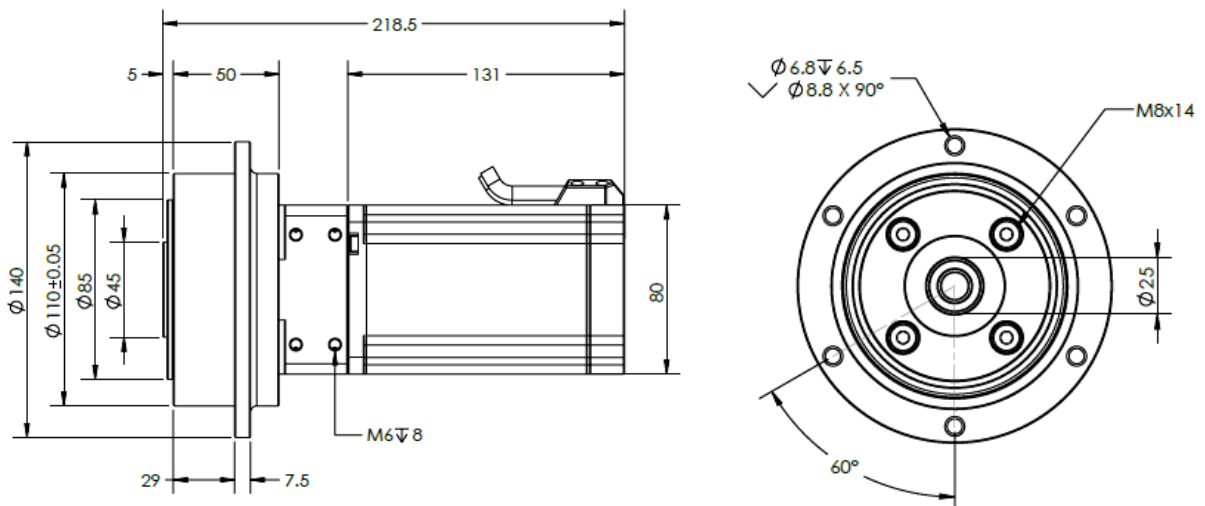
Dimensions – gearmotor GM-010300 / GM-010400
